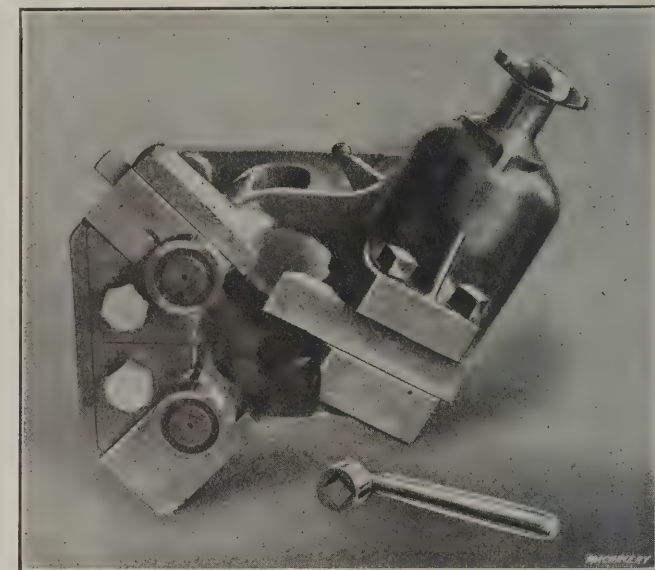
Box-type of Turning Tool for the "Libby" Turret Lathe
